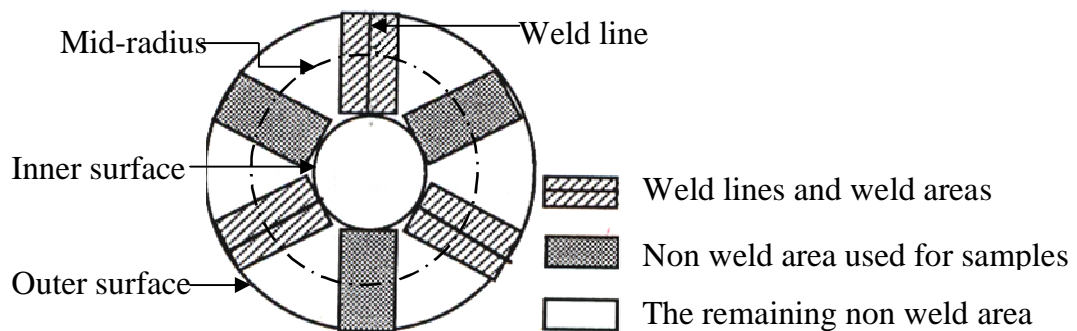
The weld and non weld areas (Nisaratanaporn 1995, p.149)
